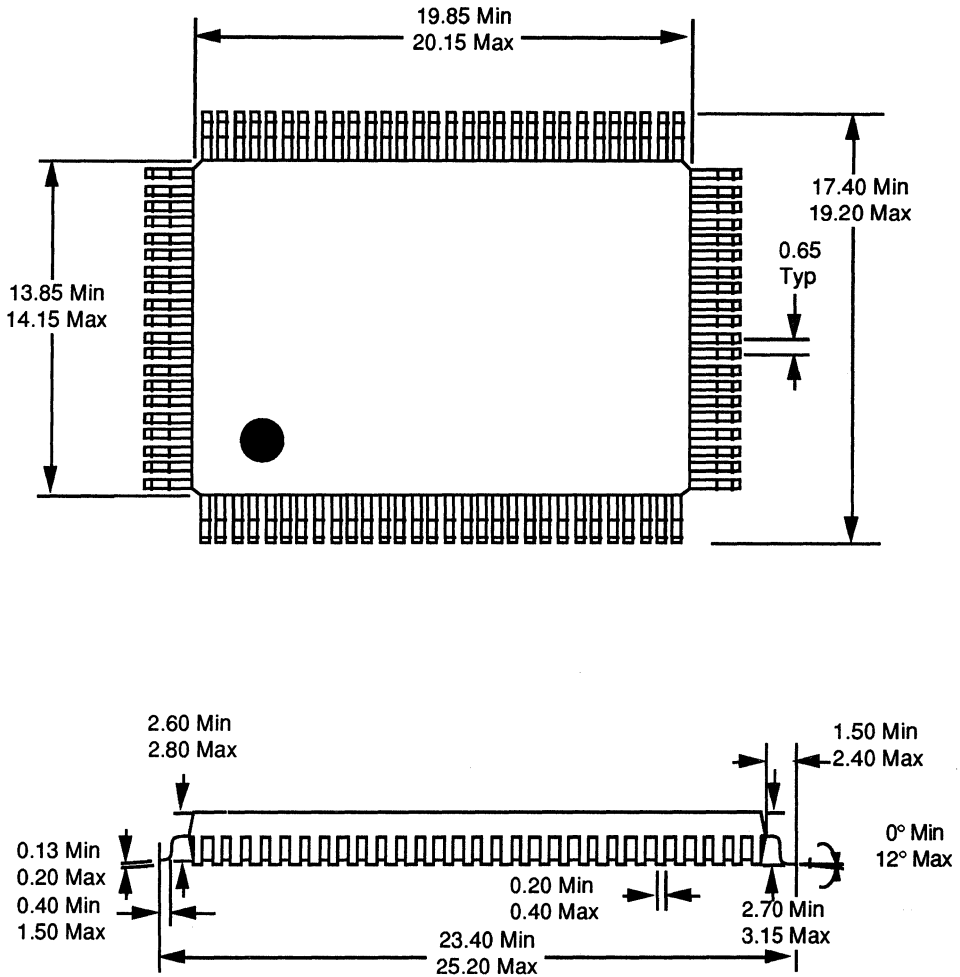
CL-CD2401 (100-pin QFP) Sample Package
